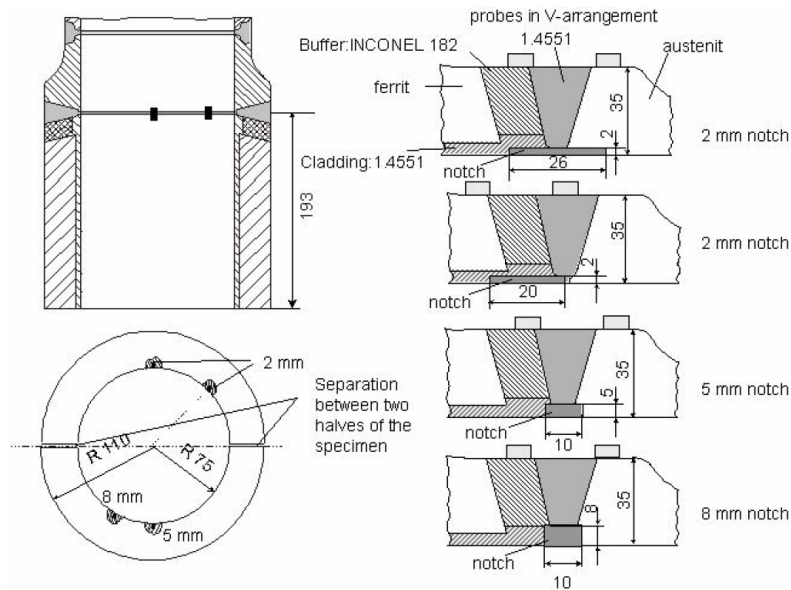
Experimental for measuring axial notches in dissimilar metal weld (Munikoti et al. 2004).
